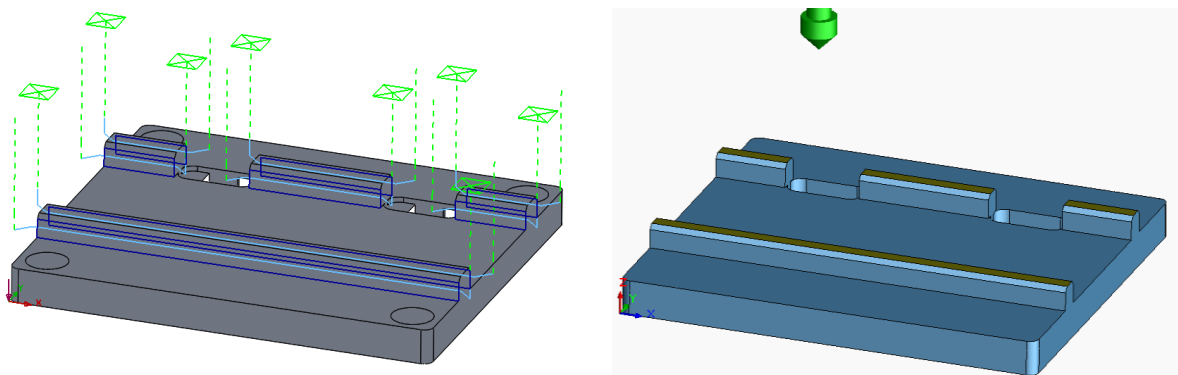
Chamfering the tracks (a) Tool path (b) Machined result
